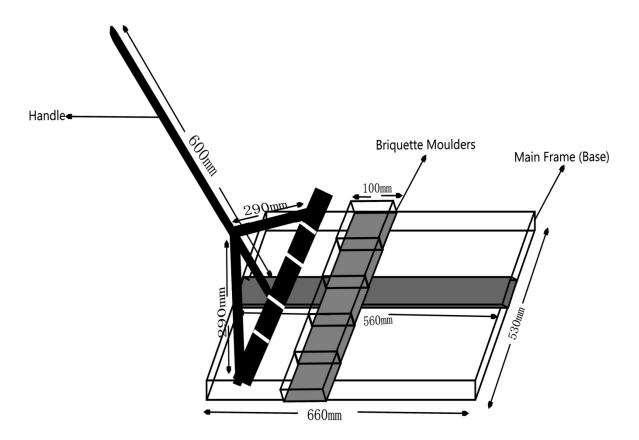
Schematic drawing showing dimensions of the designed briquette moulder.
